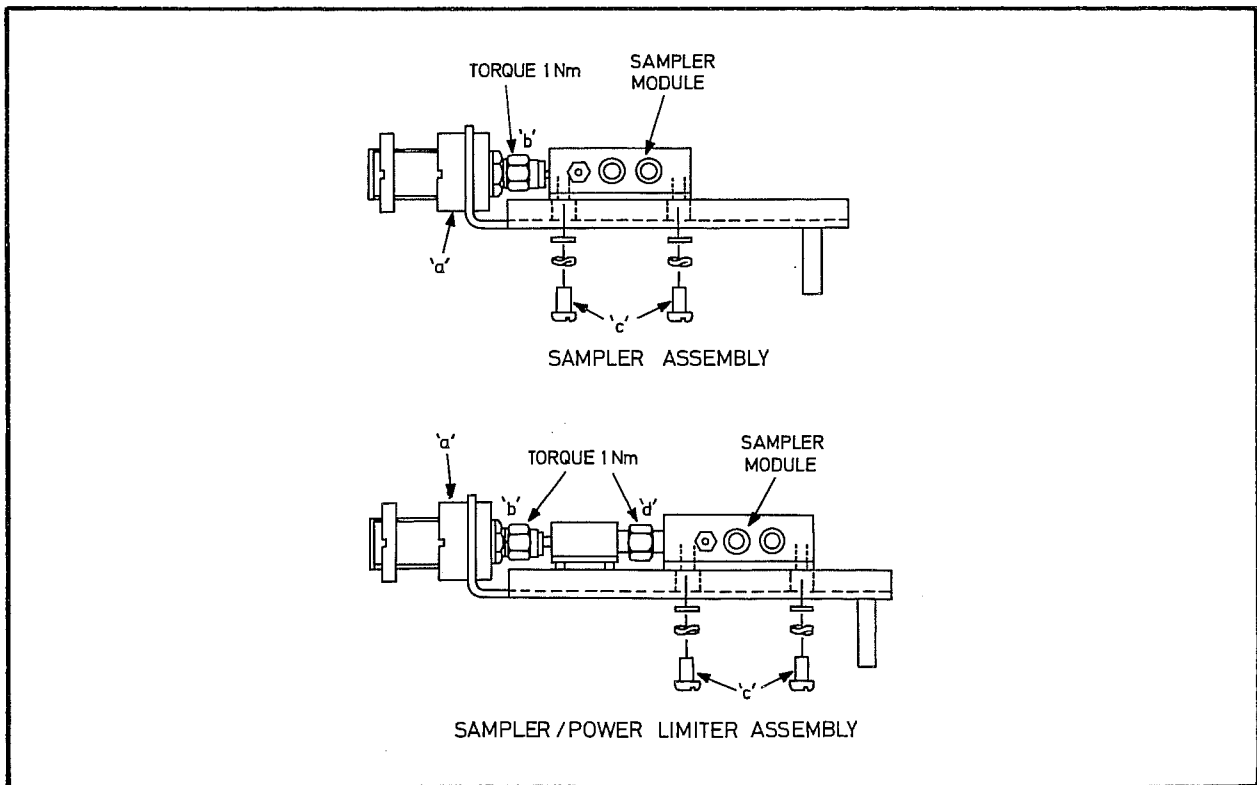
Sampler and Sampler/Power Limiter (OPT 11) Assemblies
